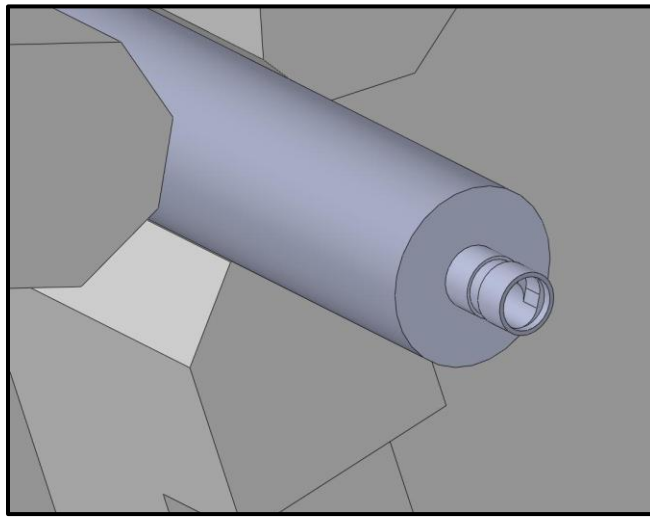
The part shown is partially removed from the rod 4mm from the end.
